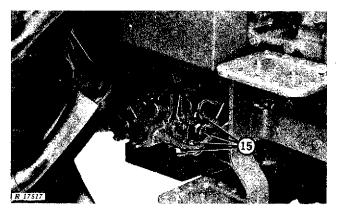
Power Front-Wheel Drive Switches (Power Shift Tractor)
